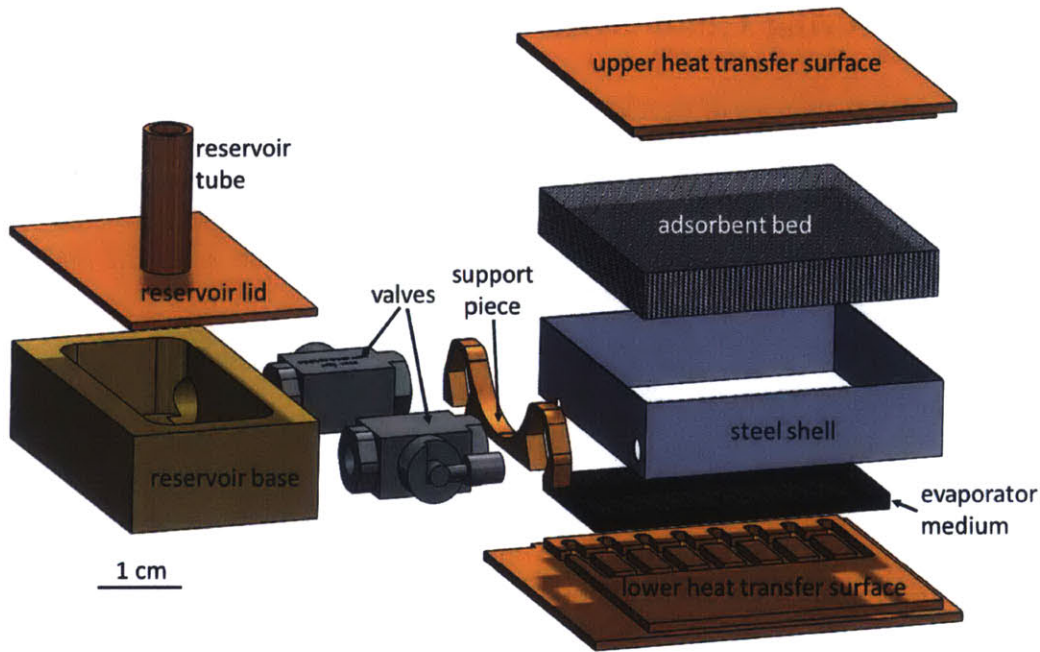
Exploded CAD model of the Button Cell Prototype design.
